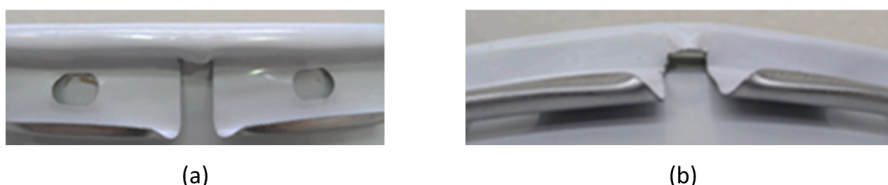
Visual appearance of the packaging after closing with the adequate tool, a) front view of the closure b) detail between claws.
